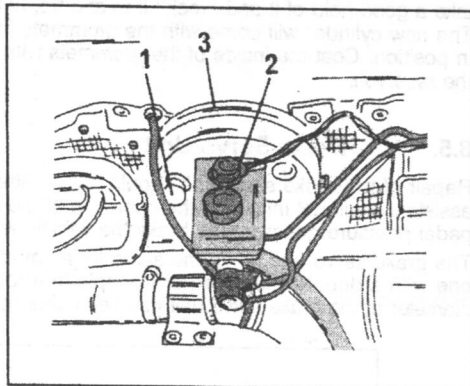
View of the fitted brake servo unit with the master brake cylinder.
